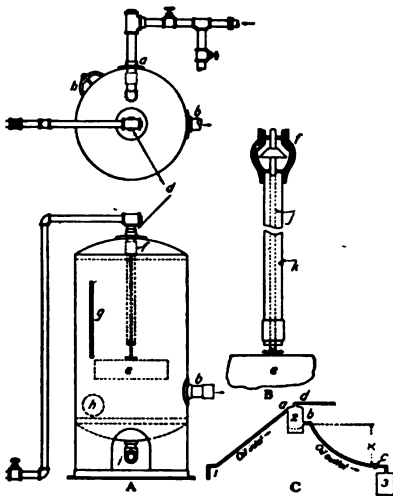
Baker trap: a, oil inlet; b, oil outlet; c, check valve; d, gas outlet; e, wooden float, 6 by 12 by 24 inches; f, emergency check valve, 2 inches in diameter; g, gage glass; h, hand hole; i, clean-out; j, valve stem supporting float; k, valve stem guide.
